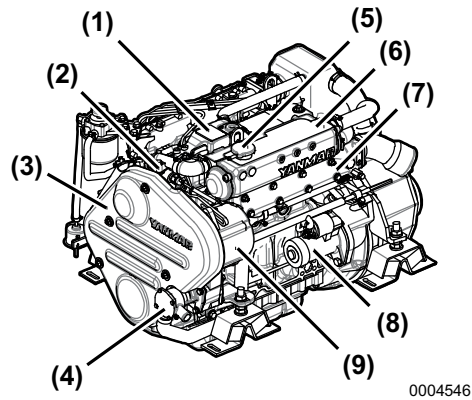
and Figure 4 illustrate a typical version of a 4JH4AE engine. Your engine may have different equipment from that illustrated.
